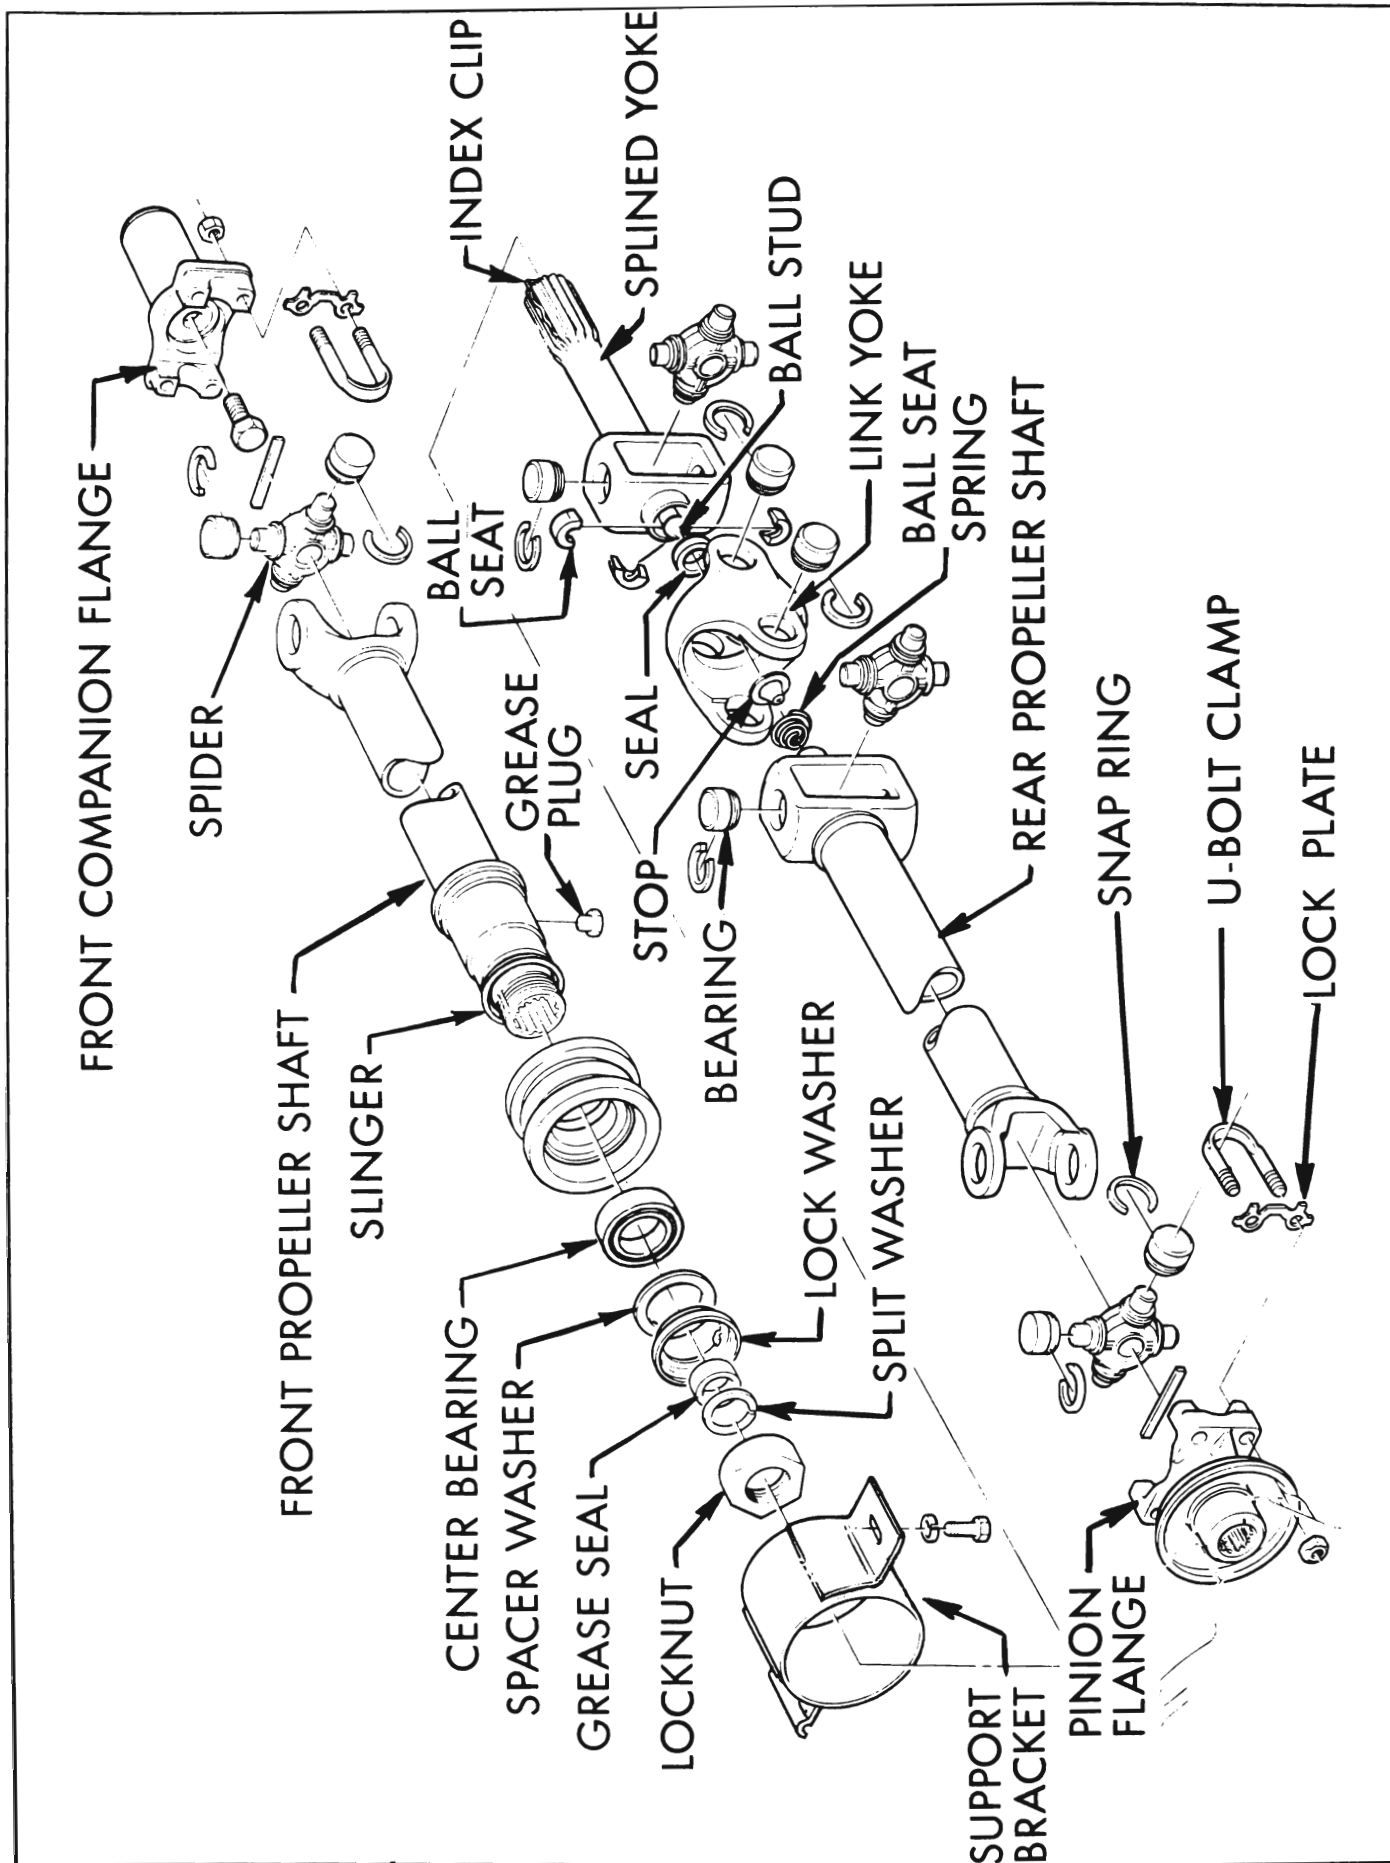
Exploded View—Buick Propeller Shaft (4-Speed Synchronmesh Shown)
